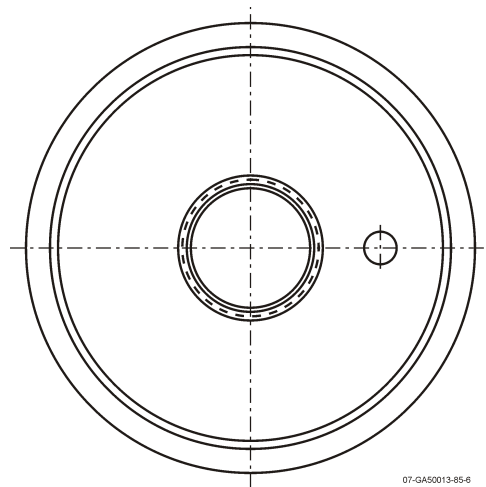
Schematic of the Intermediate Subassembly Plate (Top View).
